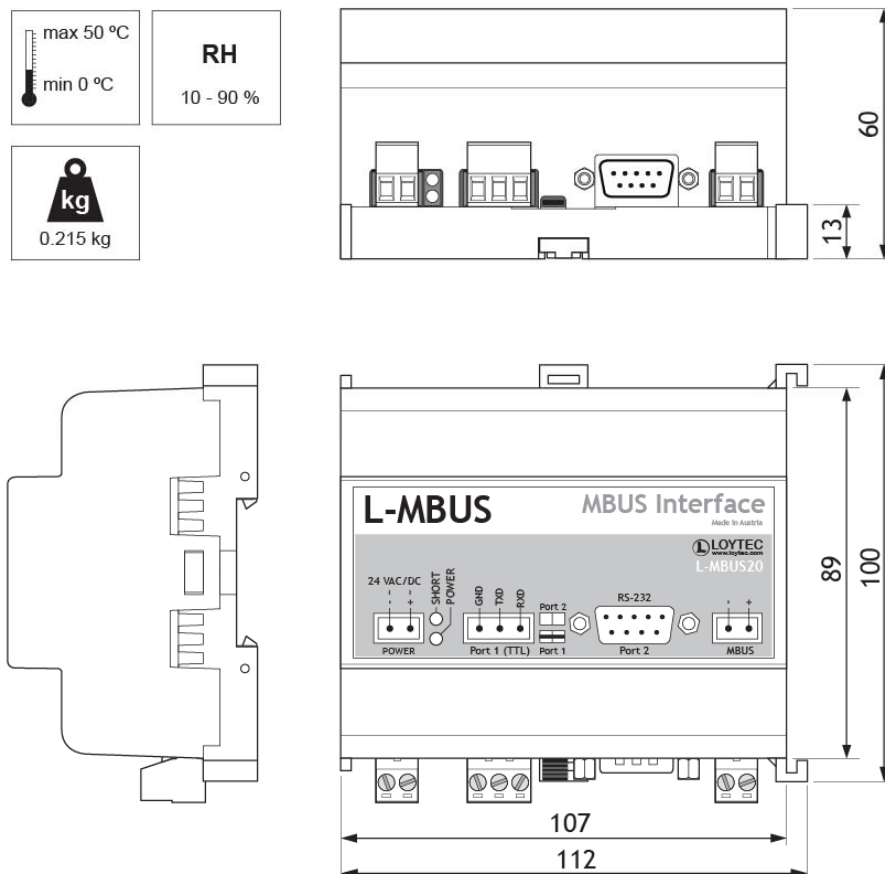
L-MBUSxx Enclosure (dimensions in mm)
